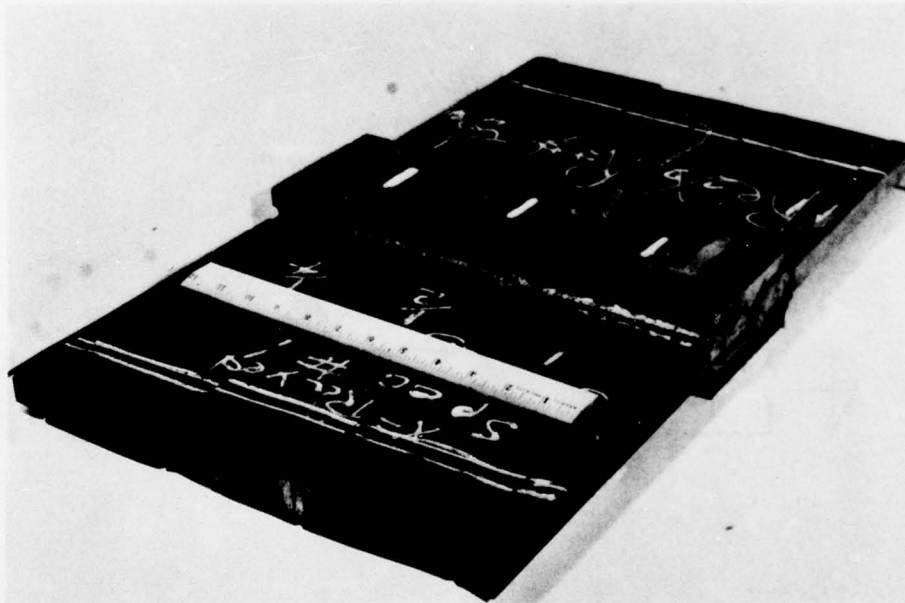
Fillet weld specimens sawed from as-welded blanks. The 1-in. (2.54 cm) segments at both weld ends were discarded.
